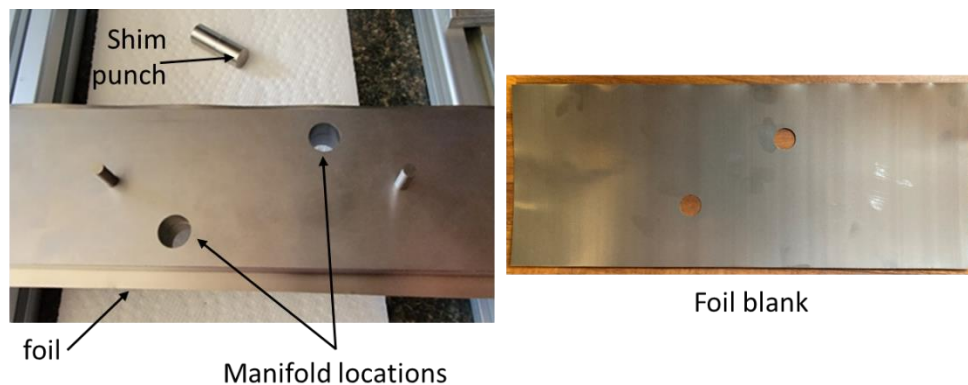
(left) 100mm x 300 mm foil inserted into the shim punch fixture and (right) foil ready for fabrication.
